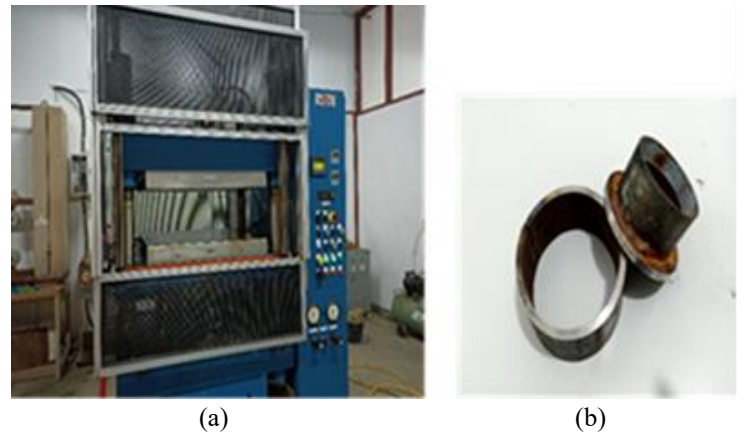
(a) Wabash G150H hot press, and (b) Mold
